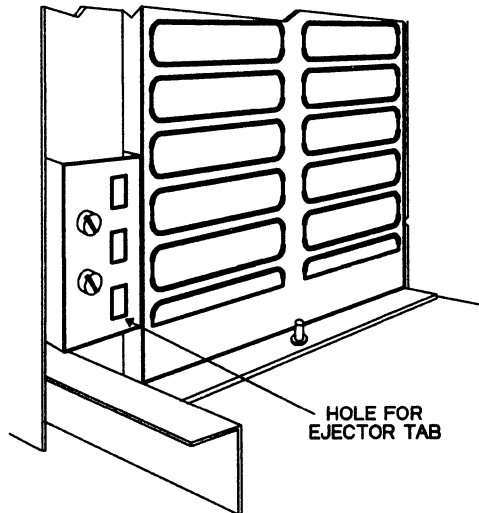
XDS/22 Card Cage Ejector Tab Holes
